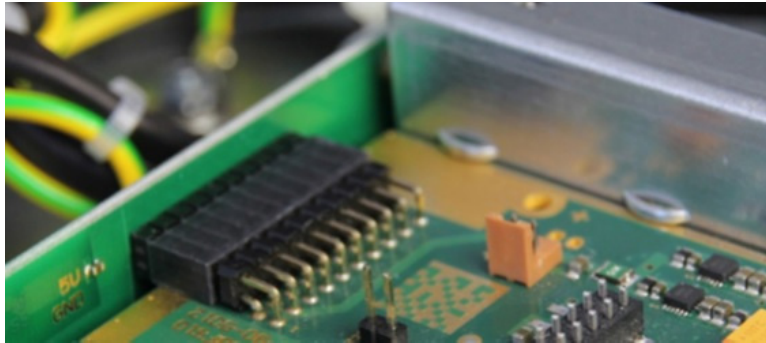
Option Card Mounted in a 2-Card or 6-Card Slide-In Chassis
